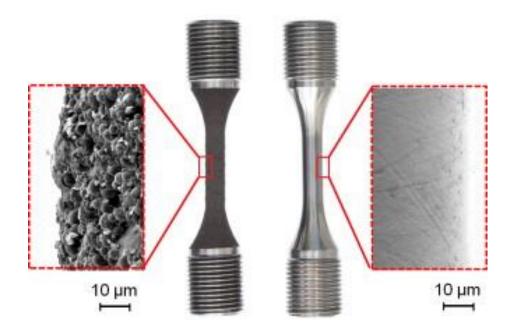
EBM surface finish for as-built (on the left) and (right) machined specimens.
